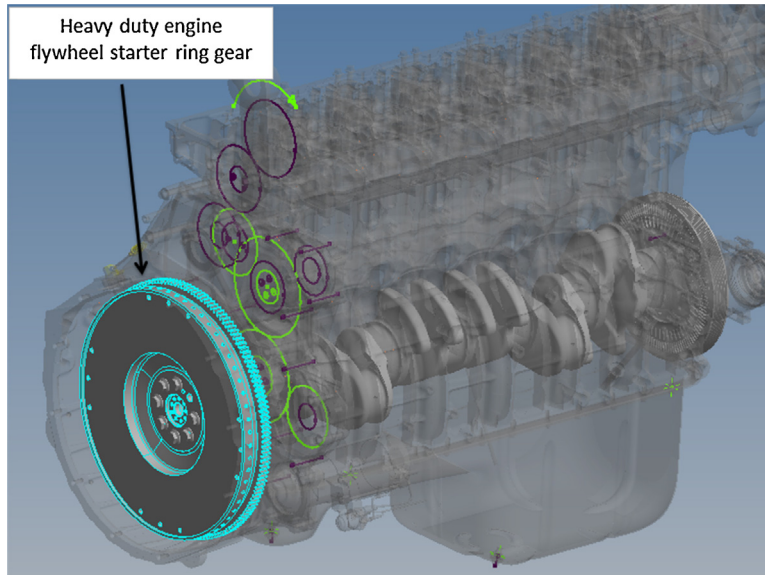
The location of flywheel starter ring gears the gear in the engine.
